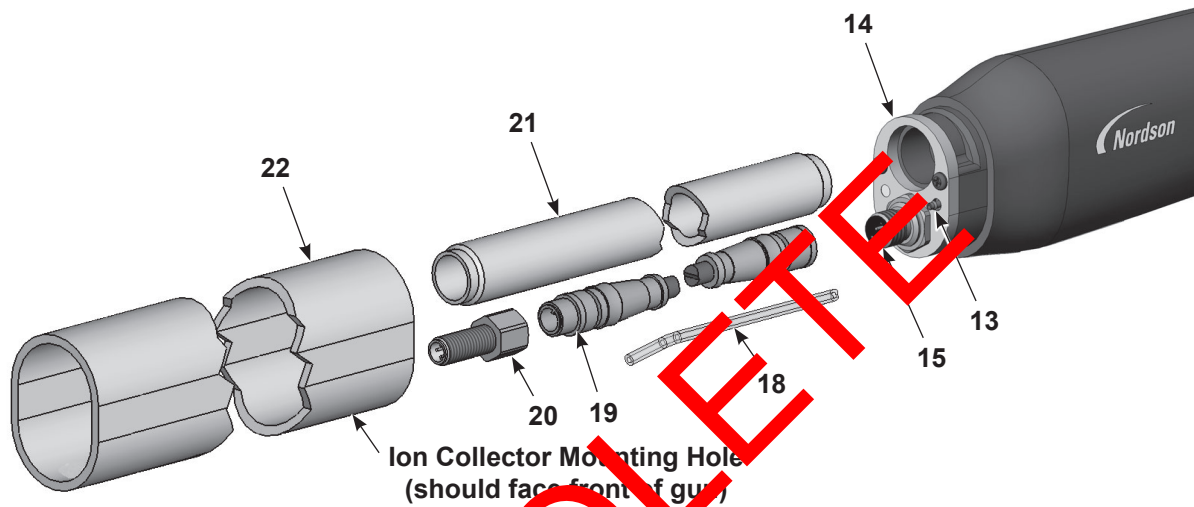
Tube-Mount Gun Disassembly 2 of 5
